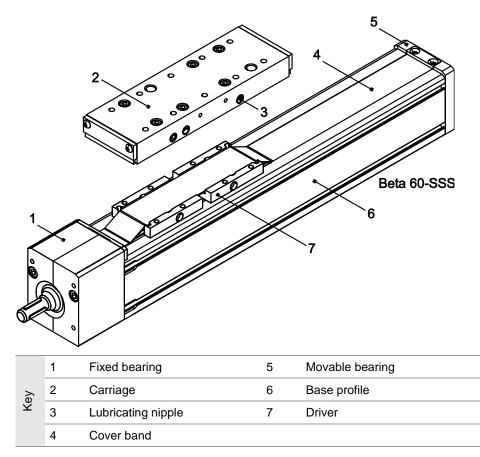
Component assemblies of the Beta 60 linear unit with spindle drive
